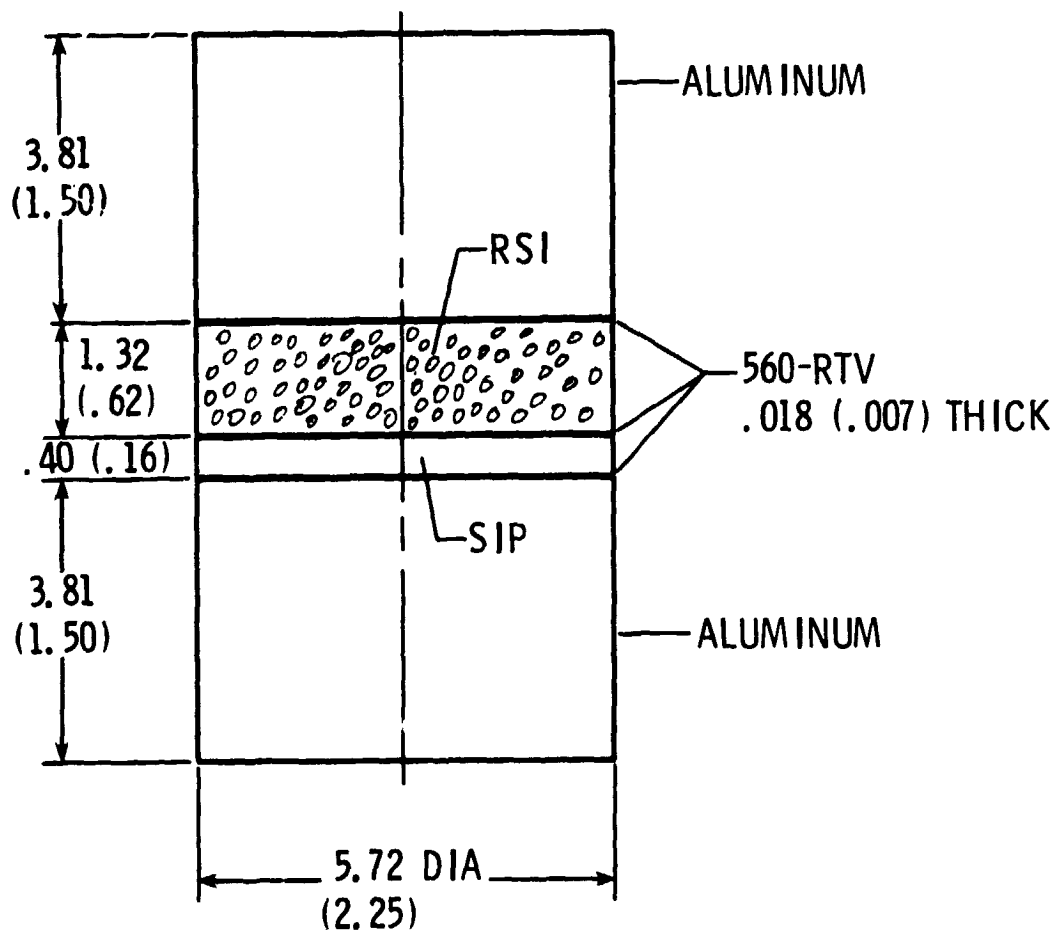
Detail of poker-chip test specimens. Dimensions given in cm (inches).
